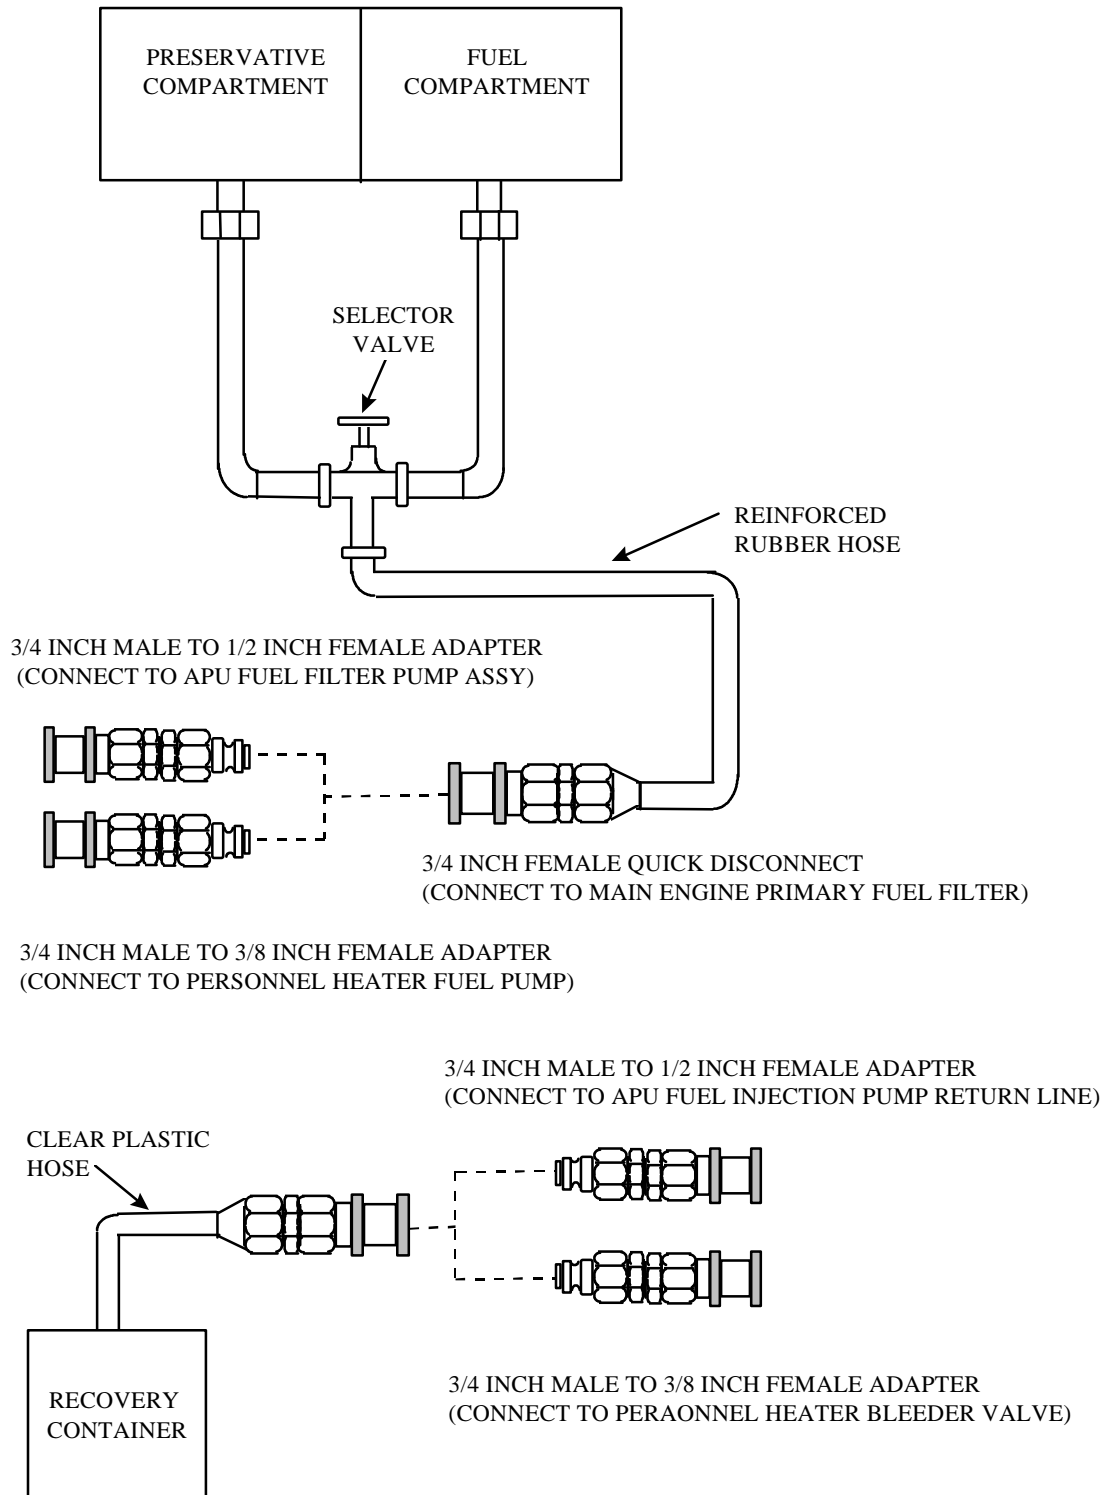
Preservative Container Assembly and Recovery Container Assembly.
